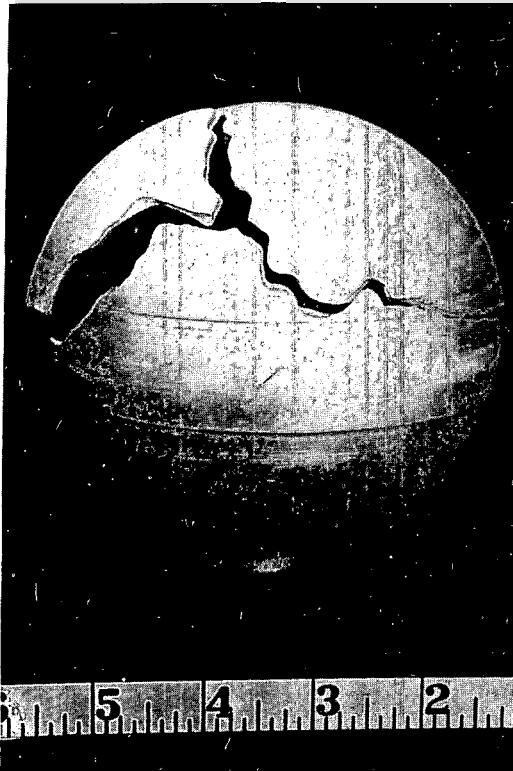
Typical burst failure of welded 7075 aluminum sphere.
